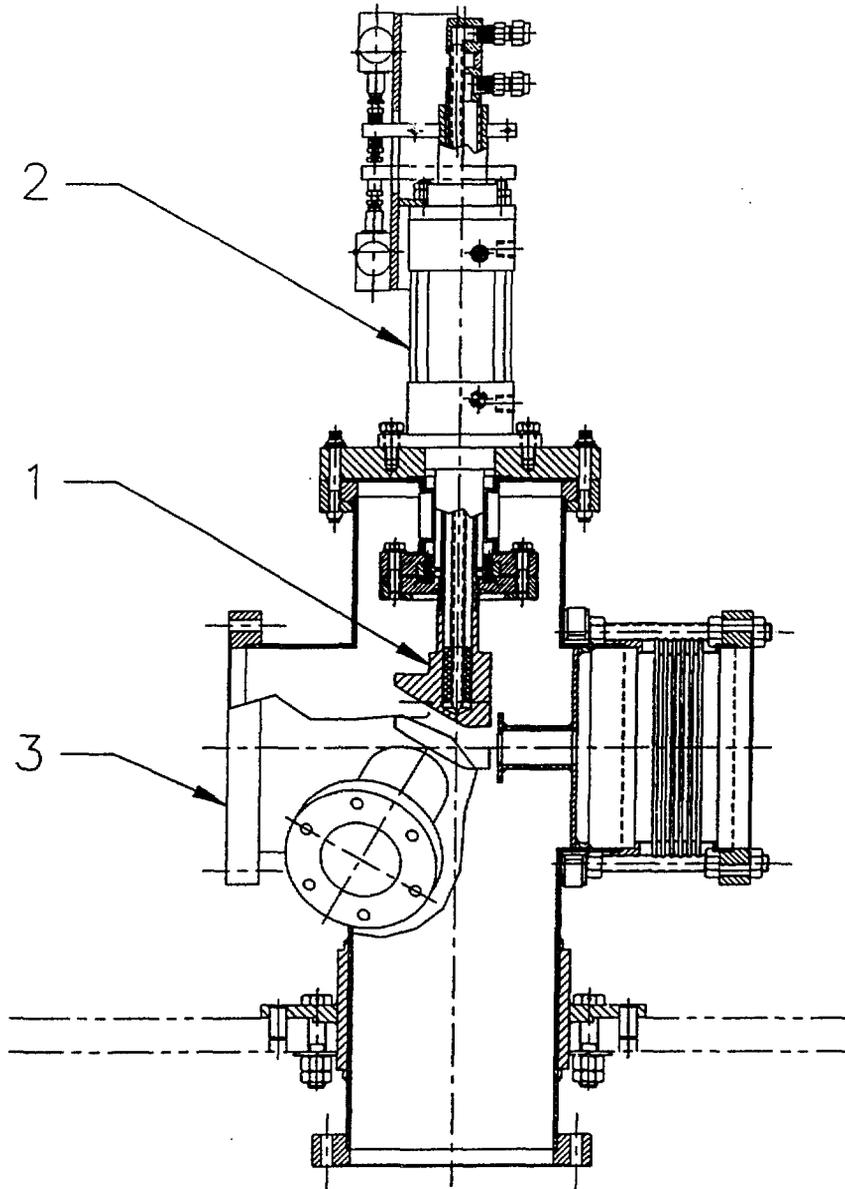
Photon shutter of the APS BM front end: (1) cooling assembly, (2) actuator assembly, (3) vacuum chamber assembly.
